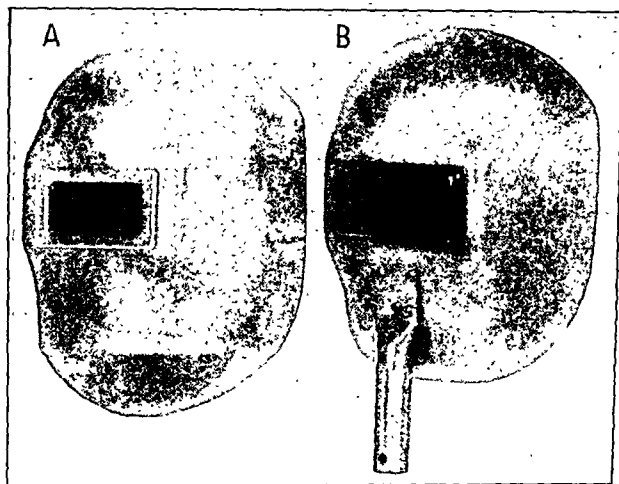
A, welder's helmet; B, welder's hand shield. (Courtesy of the American Optical Company.)
